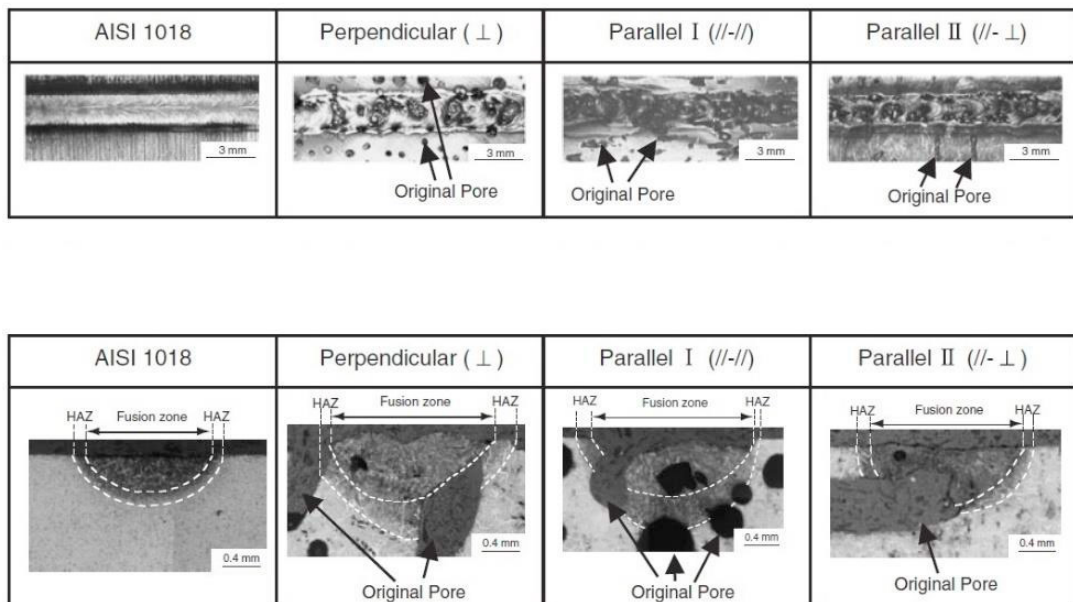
Laser weld beads (top) and cross section view (bottom) of the lotus-type porous iron (Yanagino et al. 2006).
